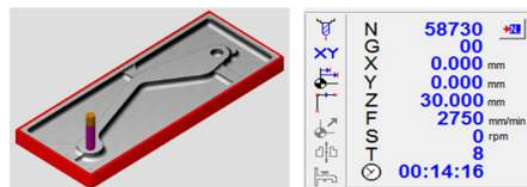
Original design with frame and tabs for machining support (bottom cut)
